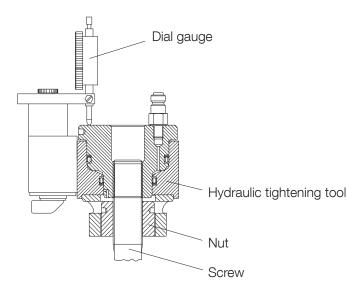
Measuring tool, 1 pc hydraulic jack will be needed.
